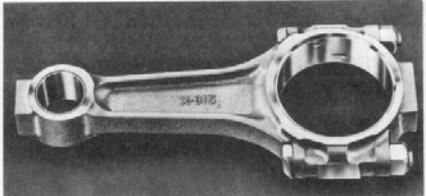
Automotive connecting rod showing crankpin and wrist pin bearings (Courtesy of Central Foundry, Division of General Motors Corporation)
